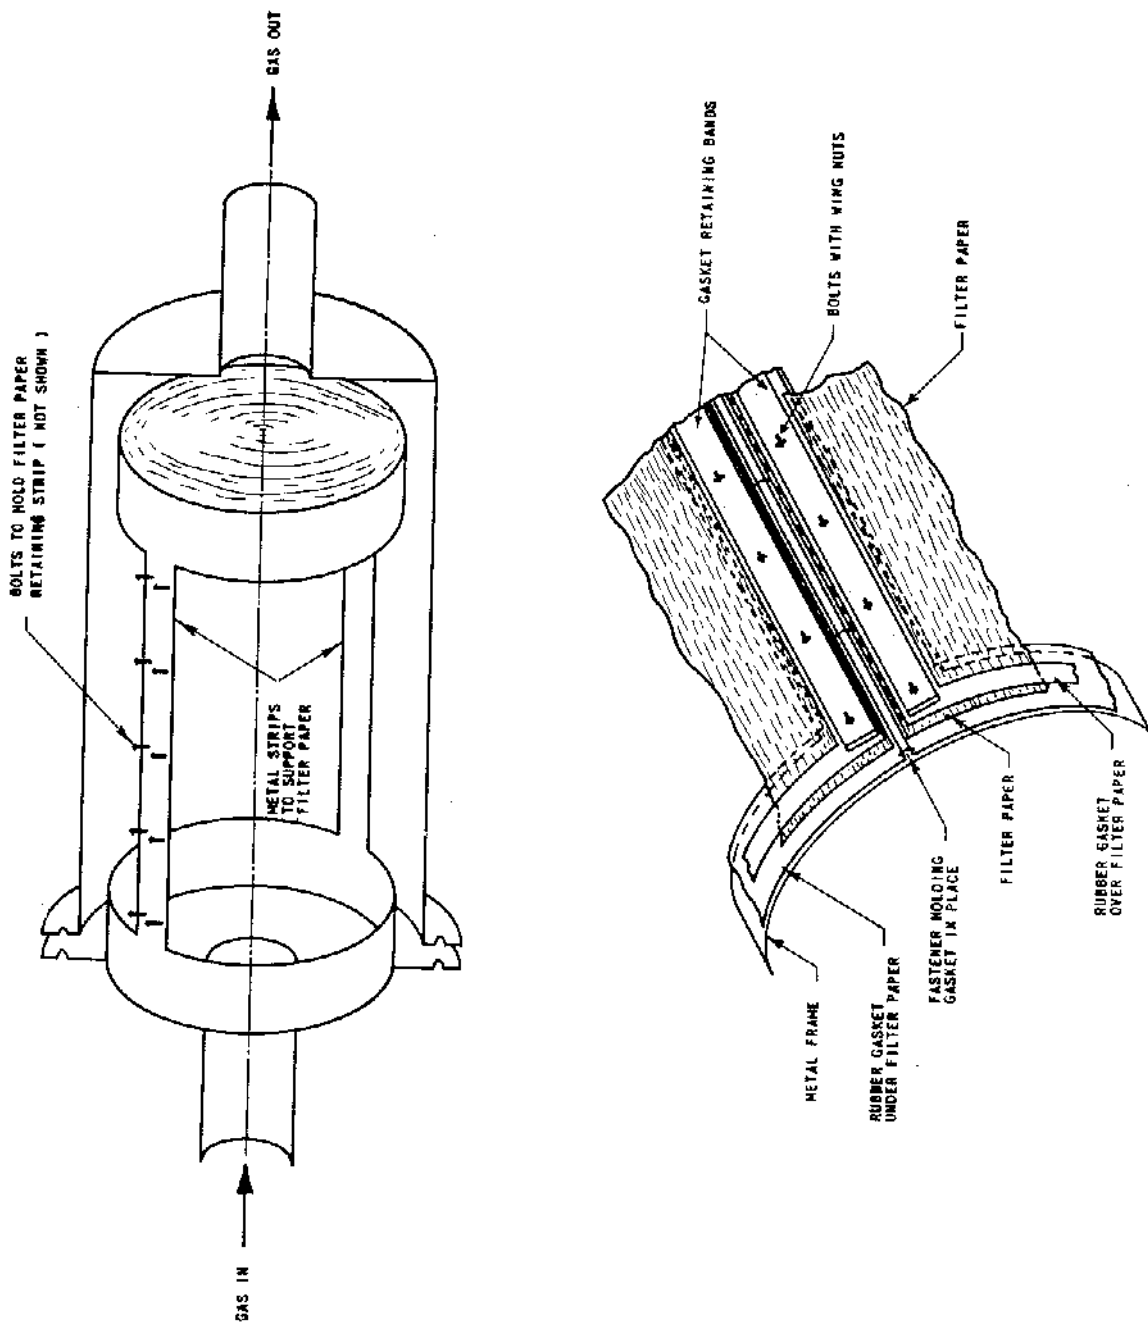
Large, cylindrical, metallic, filter-paper holder.
